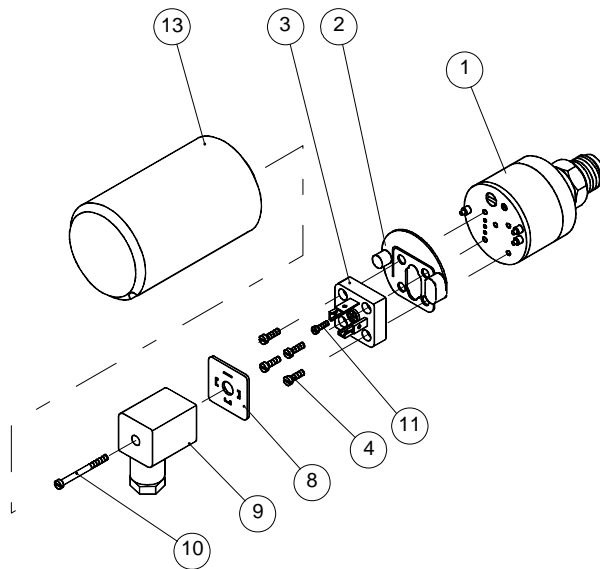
Parts list: Housing with PLUG connector, codes H
